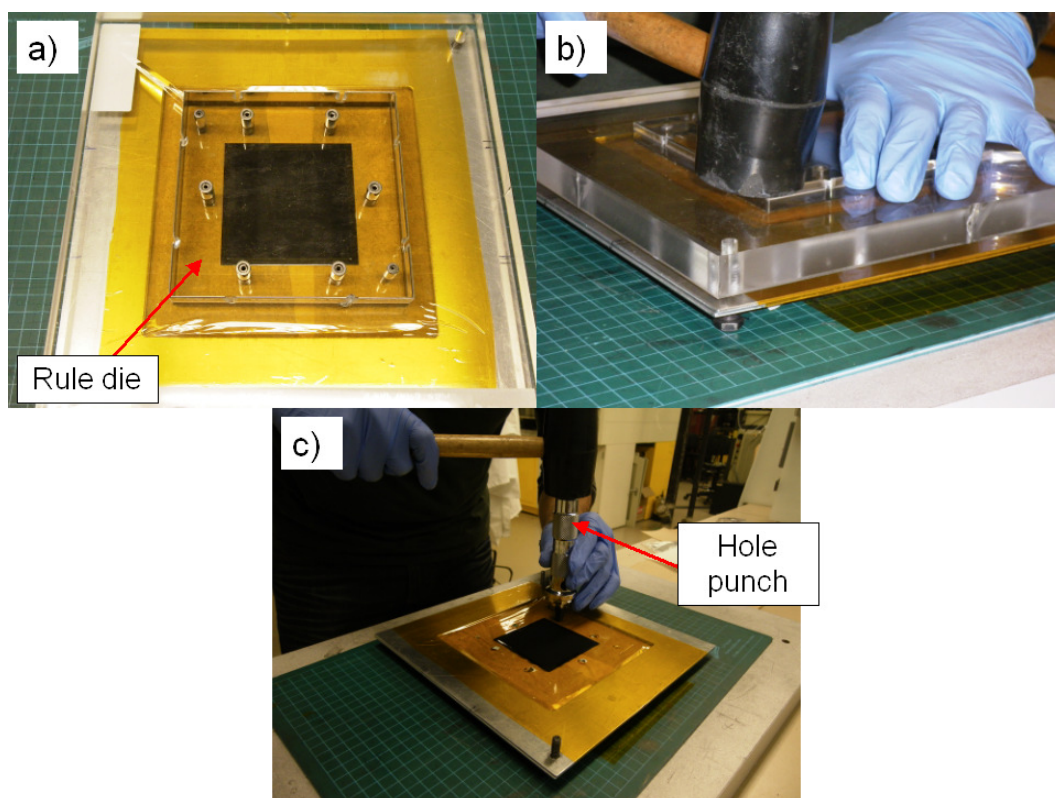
(a) Rule die on top of the polyimide film and CCM; (b) Using the rule die with a rubber mallet; and (c) Hole punch used to finalize holes that were not cut with the rule die.
